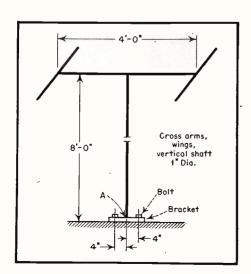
Support structure used to illustrate design of proper-size bolts.
